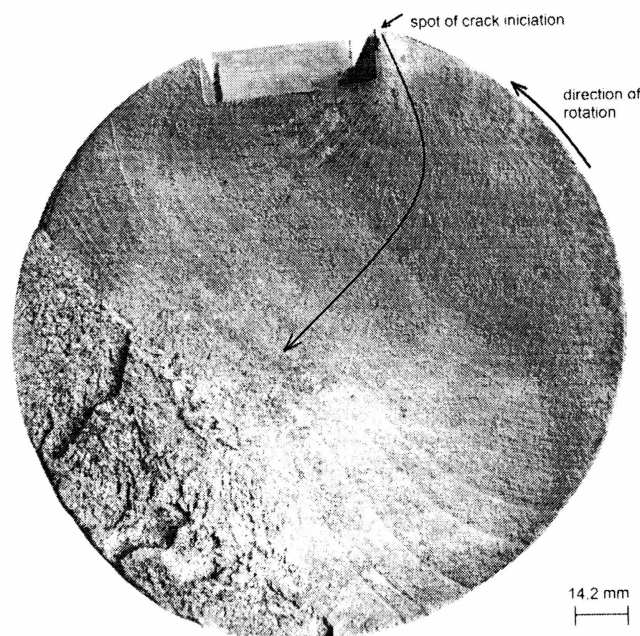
Macroscopic characteristics of the shaft fracture surface.
